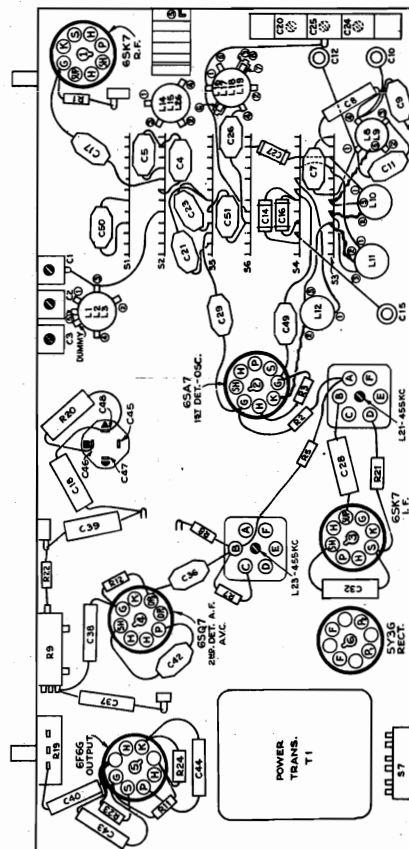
TUBE, TRIMMER AND PARTS LOCATION—BOTTOM VIEW
